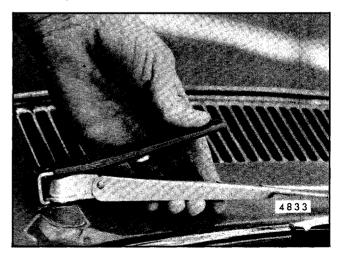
Wiper Arm Removal Tool J-8966 (or Equivalent)
